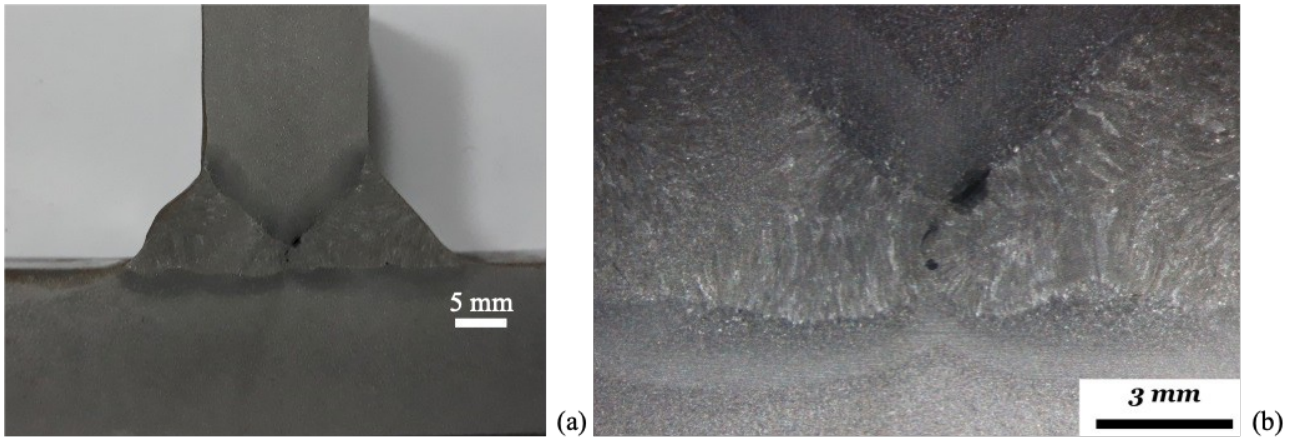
Macrostructure of the welds (a), Incomplete penetration (b).
